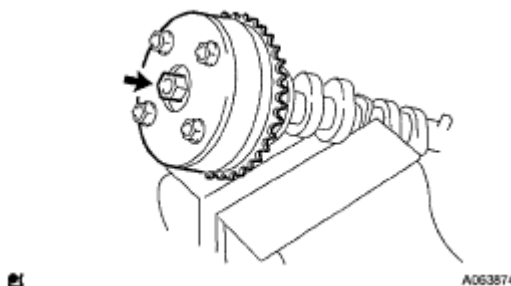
Locating Flange Bolt With Camshaft Timing Gear Fixed In Place
